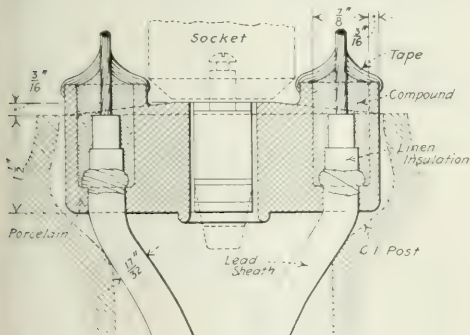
CROSS-SECTION OF POT-HEAD AND RECEPTACLE
